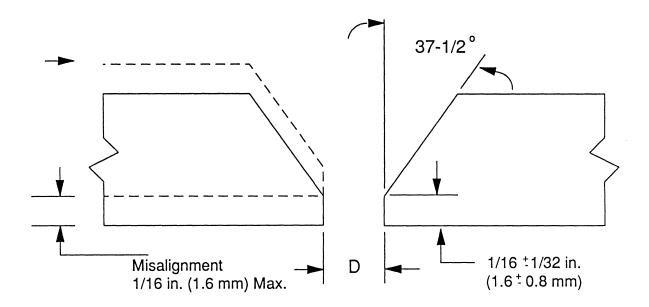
Typical joint design for pipe welded without consumable insert and GTAW root. D < diameter of filler wire for keyhole method. D > diameter of filler wire for continuous feeding method.
